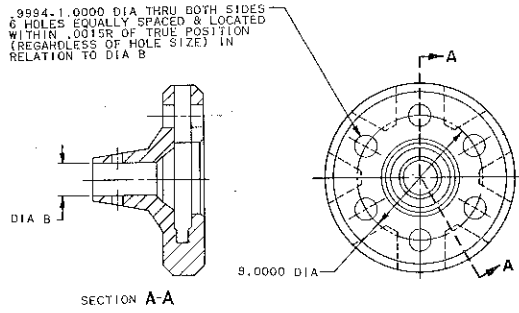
In the case of this planetary pinion cage, each hole location has to be held within the specified positional tolerance, regardless of hole size.
